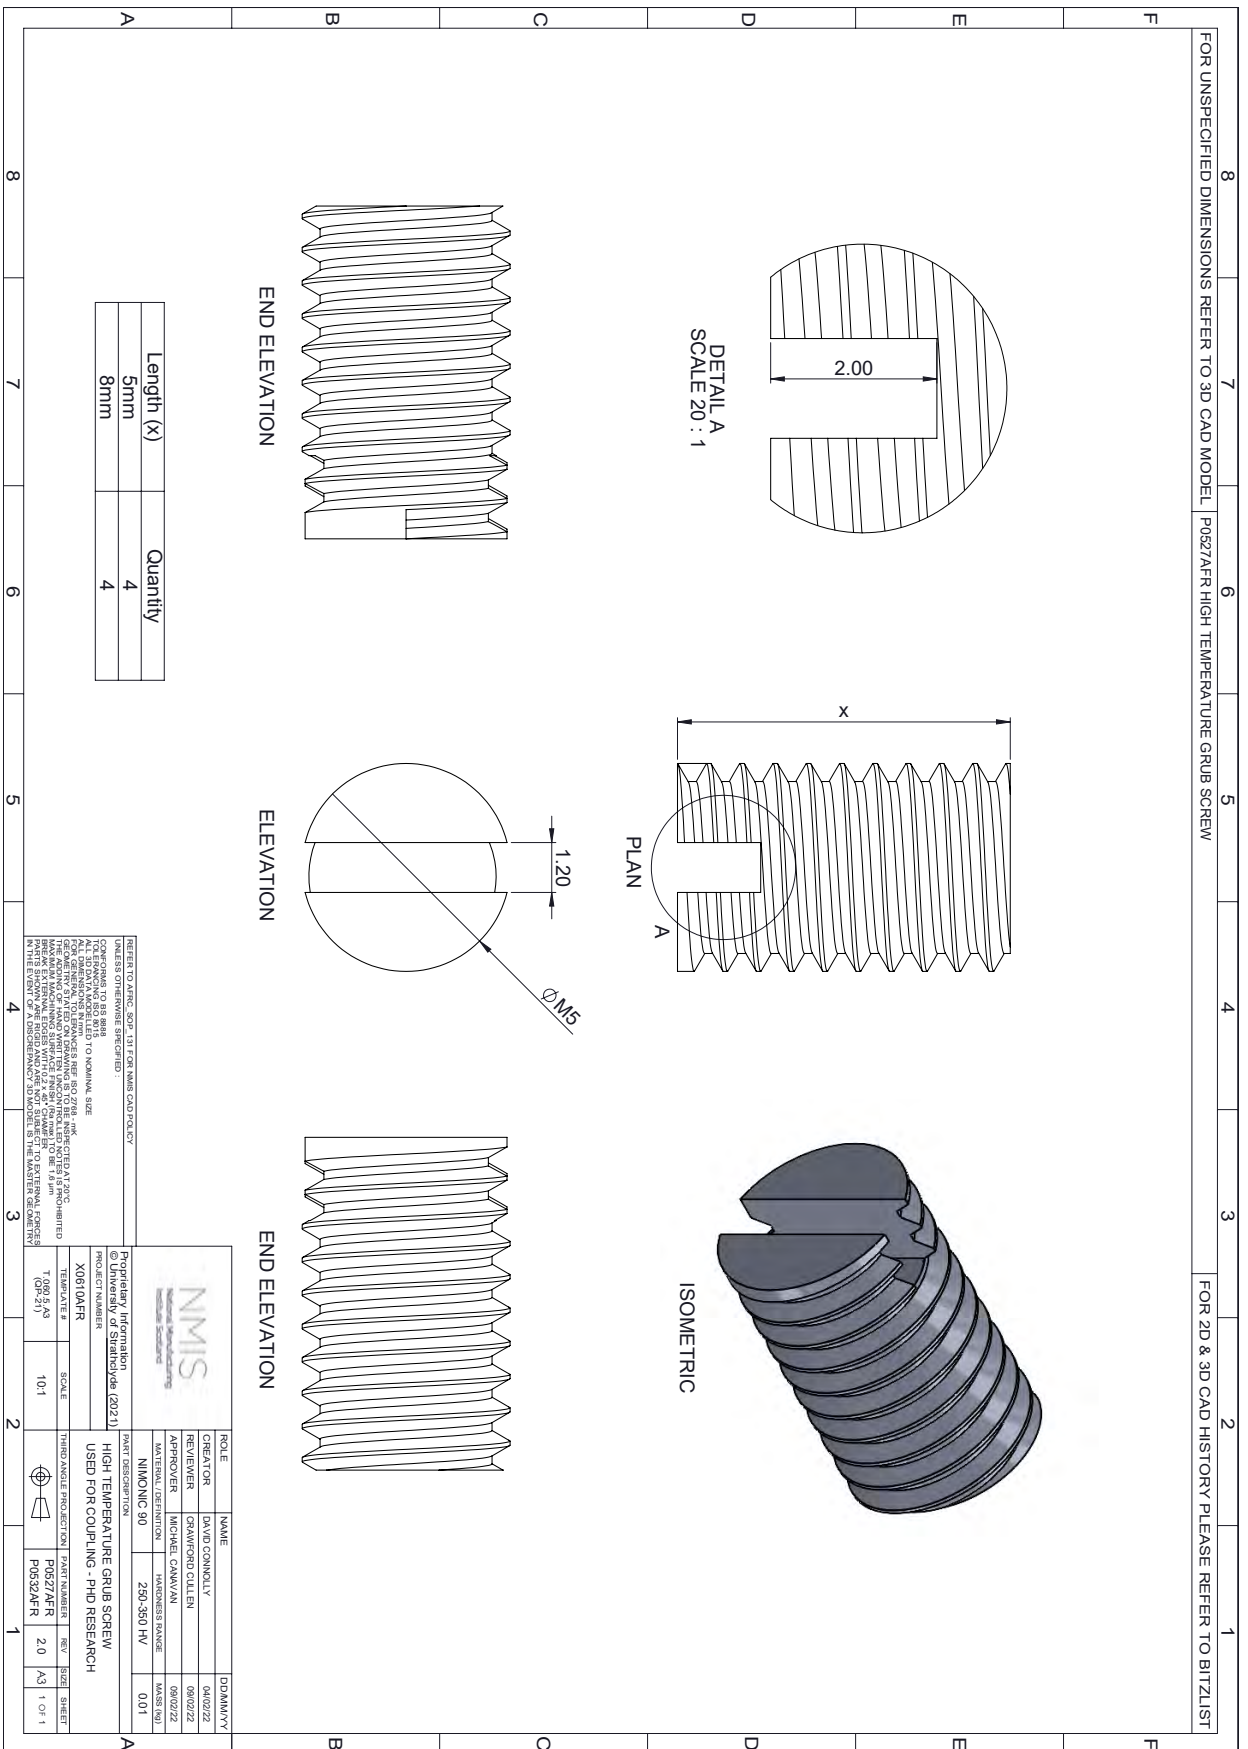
CAD Engineering drawing for Nimonic®-90 high temperature grub screws used with the Nimonic®-90 manipulator rod and coupling.
